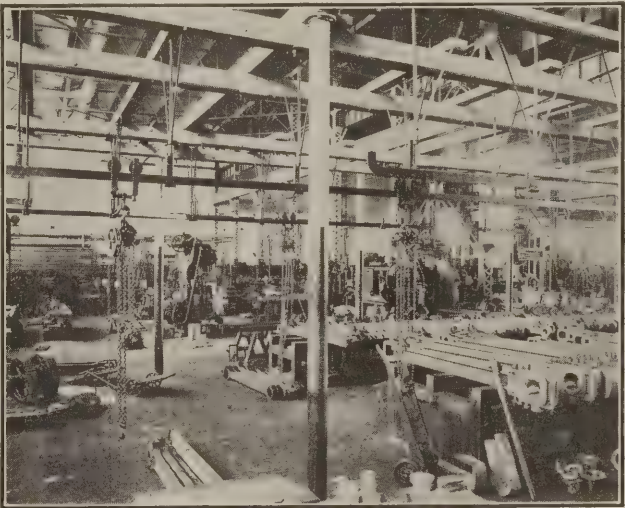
Corner in Machine Shop Showing Hand Cranes and Trolley.
